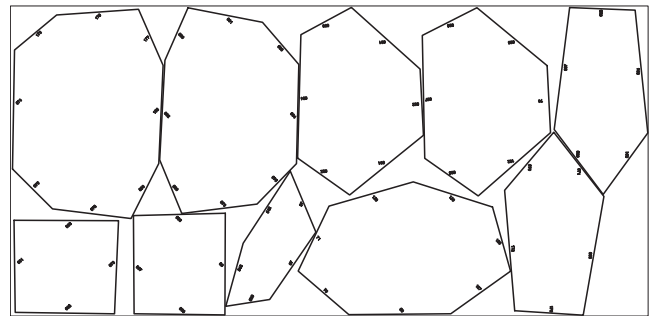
Rectangular sheet filled with planar panels, ready to be laser cut.
